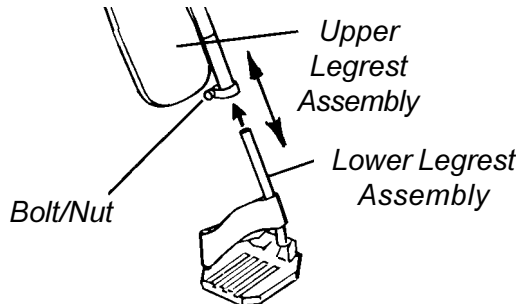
ADJUSTING MECHANICAL ELEVATING LEGRESTS - FOOTPLATE HEIGHT
